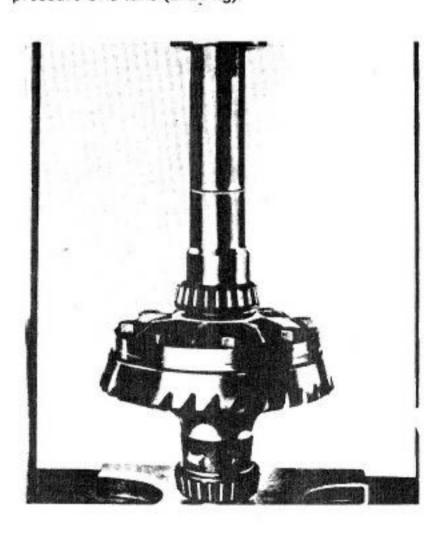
Pressing heated inner bearing races home on the differential.
